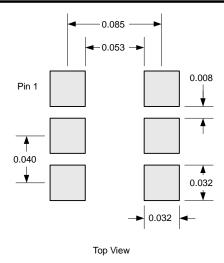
THS9001 Recommended Footprint (dimensions in inches)
